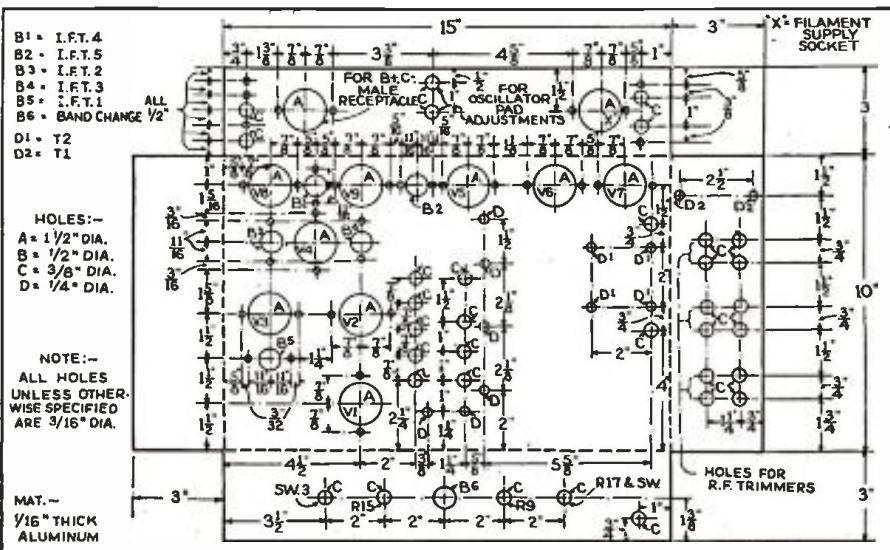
Chassis drilling and fabricating details including the sizes of all holes.
